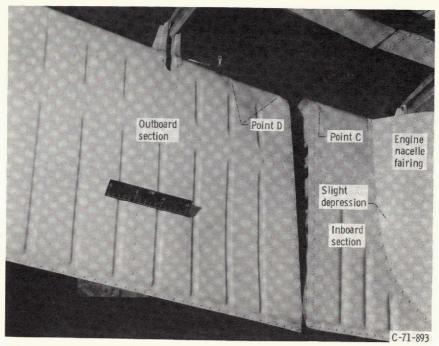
Damage to lower surfaces of right inboard and outboard flaps. Flap control rod disconnected with flaps hanging from flap tracks.
